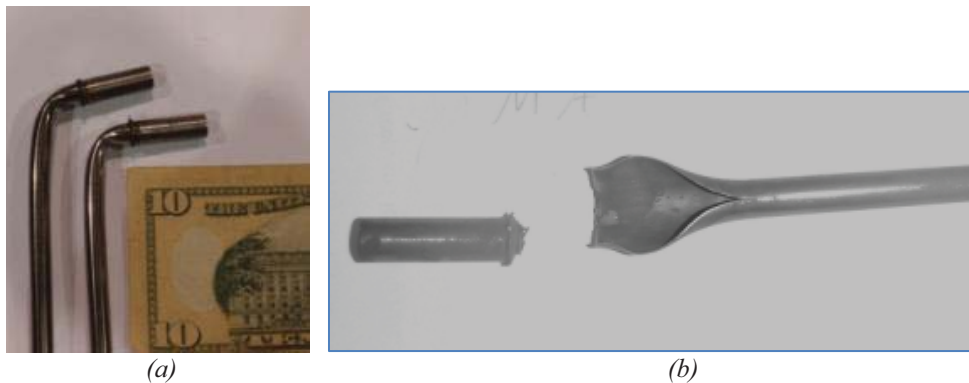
(a) Two bend tested MA957-HT9 PRW joints, (b) A failed burst test specimen at 575°C and a pressure of 13,000 psi.
